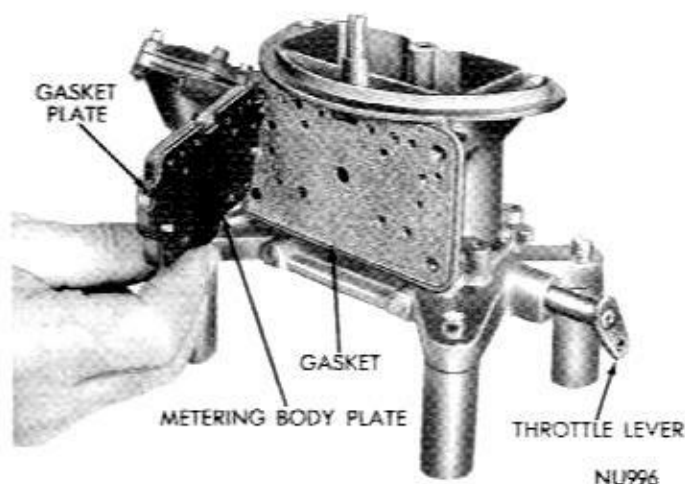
Removing or Installing Metering Body, Plate and Gaskets
